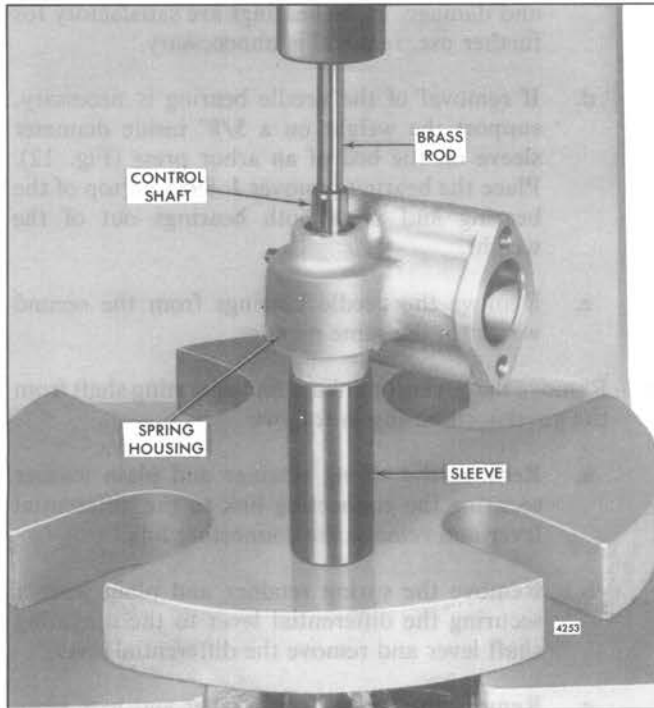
Removing Speed Control Shaft, Bearing and Cup Plug from Variable Speed Spring Housing
